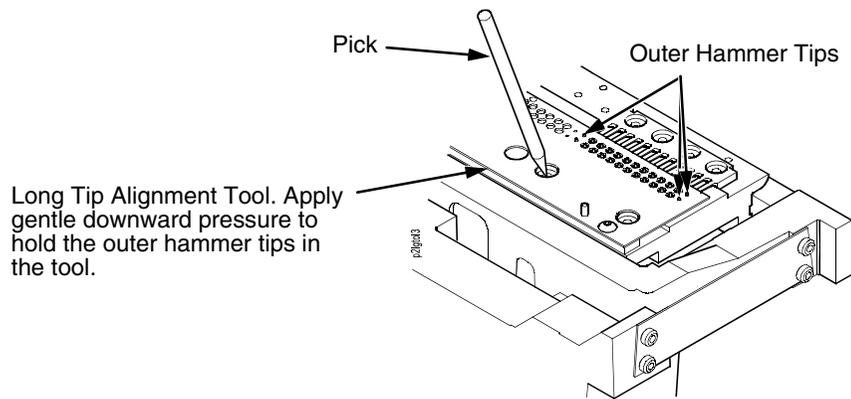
Using the Pick to Maneuver the Hammer Tips into the Alignment Tool Holes
